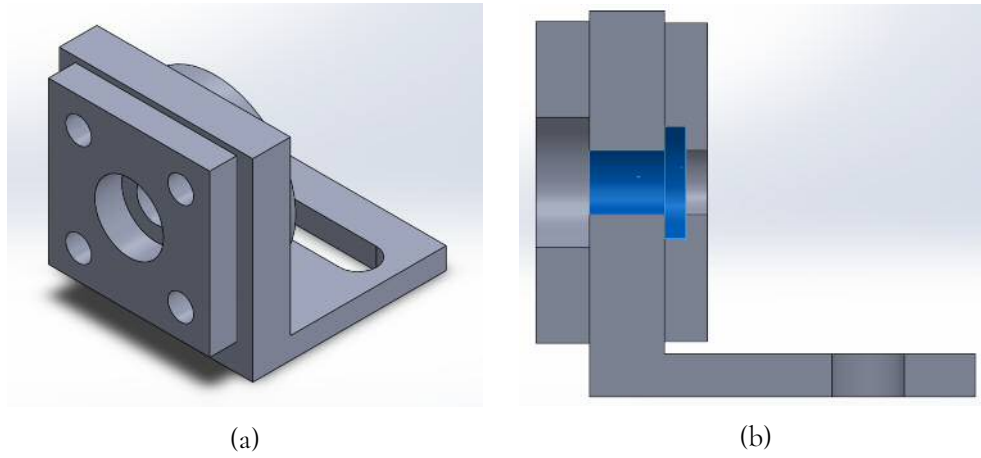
a) CAD drawing of diode housing and b) its cross-section. Highlighted in blue is where the laser diode sits.
